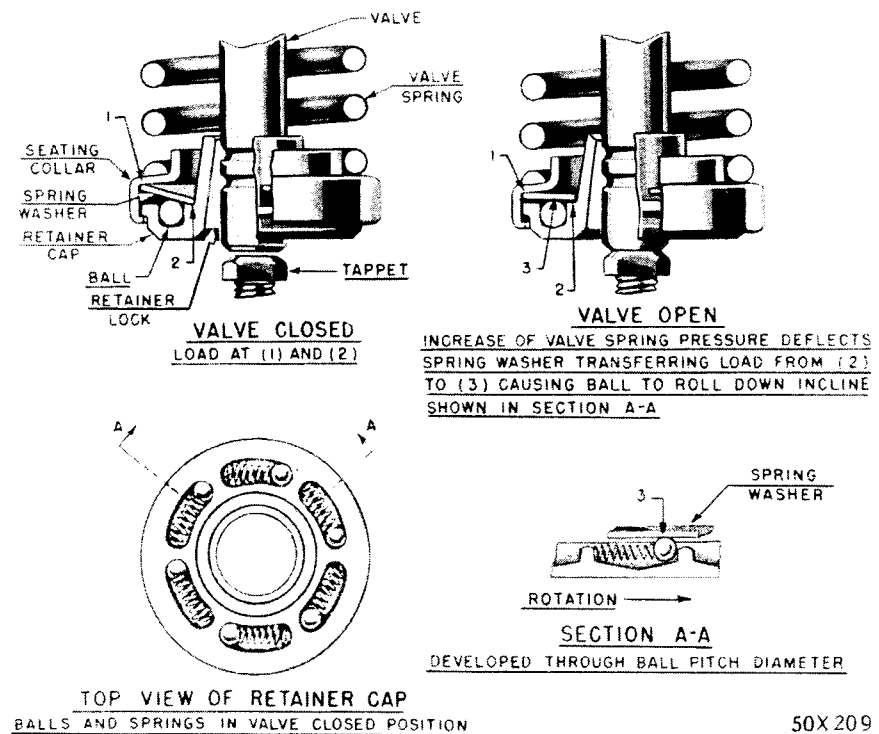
Exhaust Valve Spring Retainer Assembly (Schematic)
